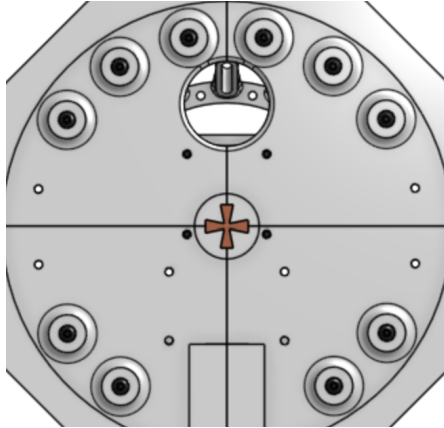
Lower trunk lowered onto the base plate around the gearbox assembly.
